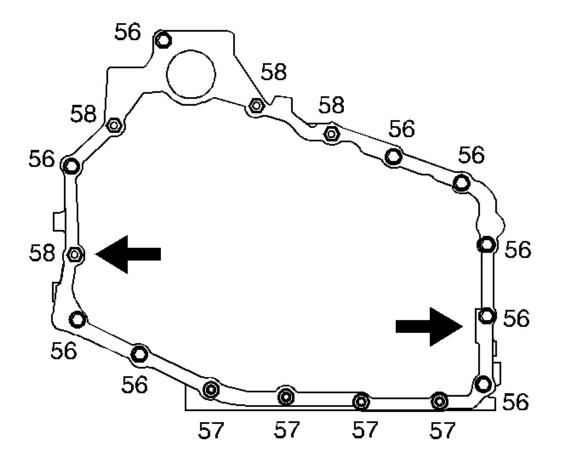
Identifying Control Valve Body Cover Bolt & Control Valve Body Cover
